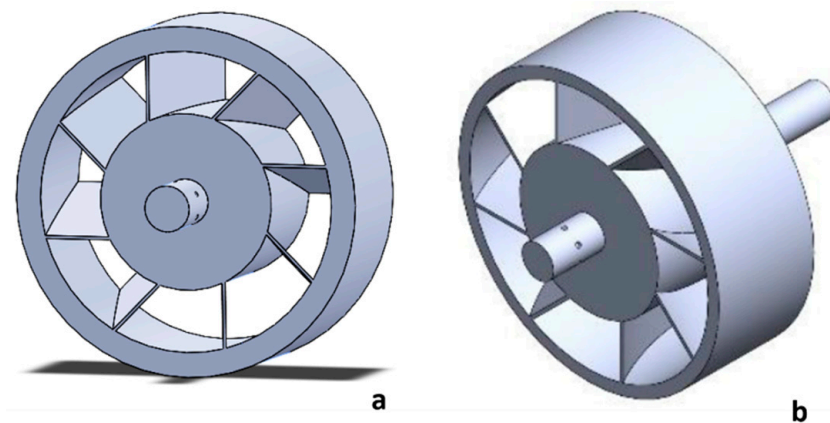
Optimized swirler with fuel injector: (a) front view; (b) isometric view.
